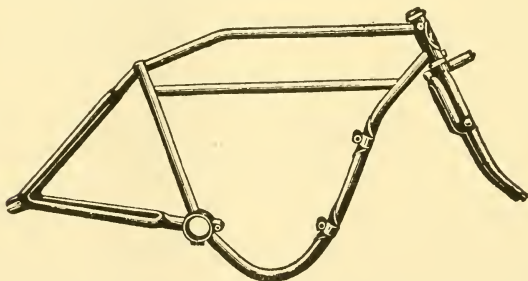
,—A motor cycle frame. The lower member is curved to conform to the shape of the crank case of the engine. The fork consists of two hinged pieces held in place by a spring forming a shock absorbing device.
